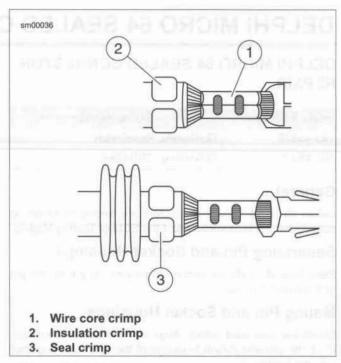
Metri-Pack Connector: Inspect Core and Insulation/Seal Crimps
